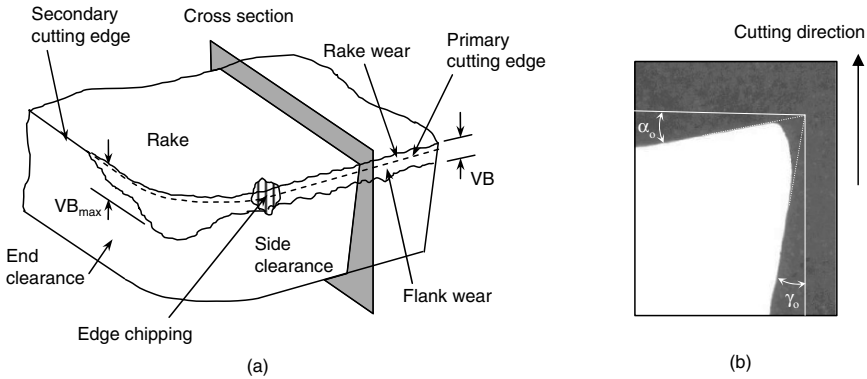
Types of tool wear in machining FRPs (a), and cross section of a replica of the cutting edge (b)
